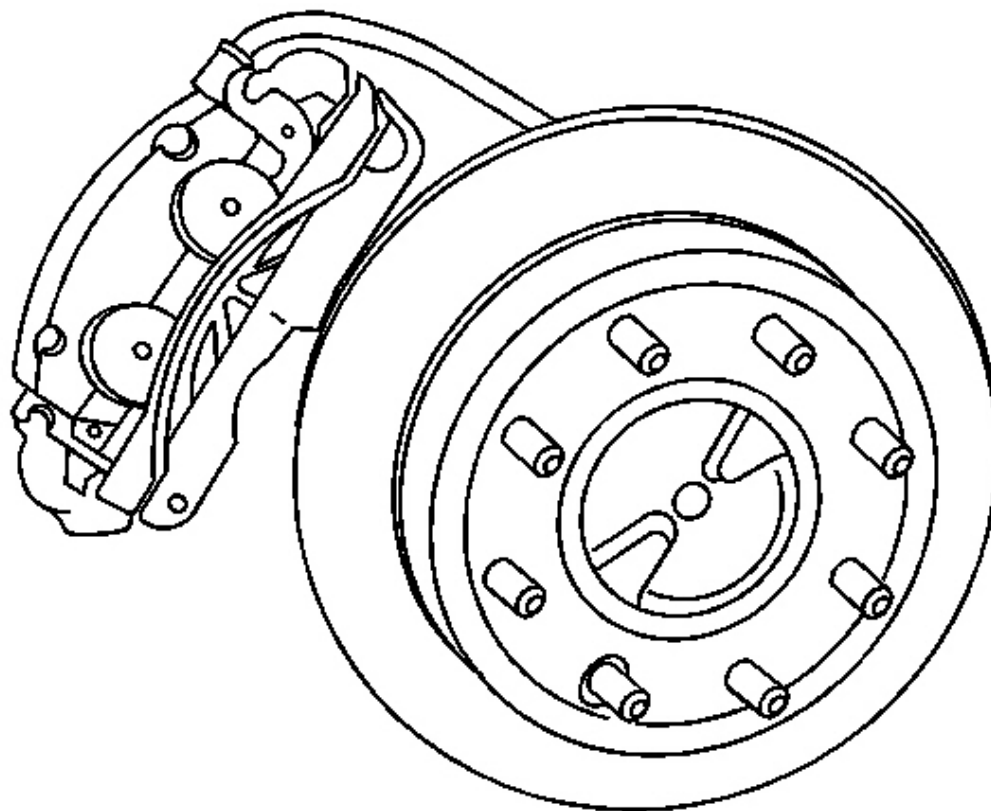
Brake Caliper & Bracket - Rear (Except Dual Wheels or NYS)
